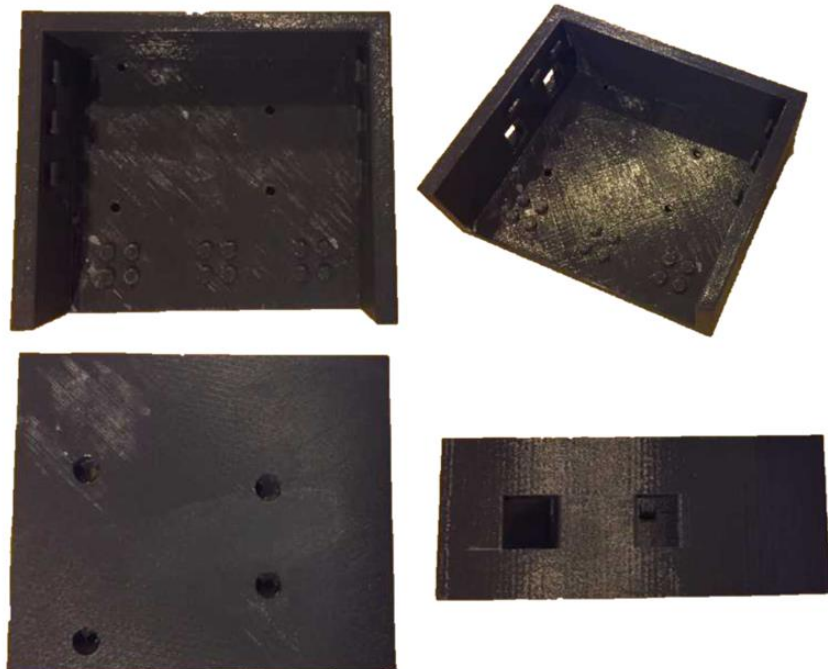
Third Iteration 3D Printed Main Platform: Bottom View (Bottom Left), Top View (Top Left), Left Side View (Bottom Right), and Isometric View (Top Right)
